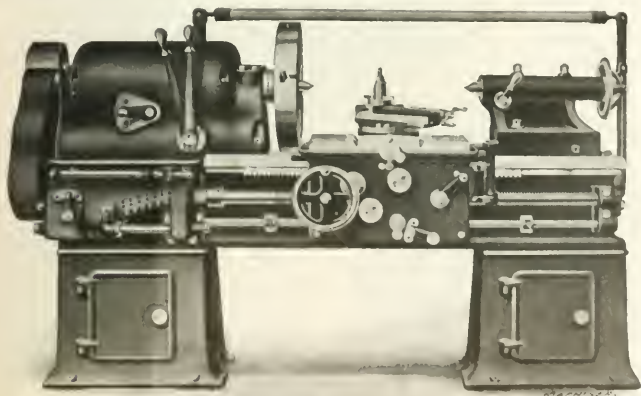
Rahn 18-inch Engine Lathe equipped with Single-pulley Drive and All-geared Head
